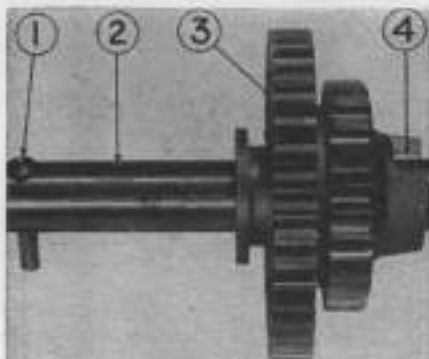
Reverse idler gear and shaft—All series except 20, 22, 55, 81, 82, 201, 302 and 303.
